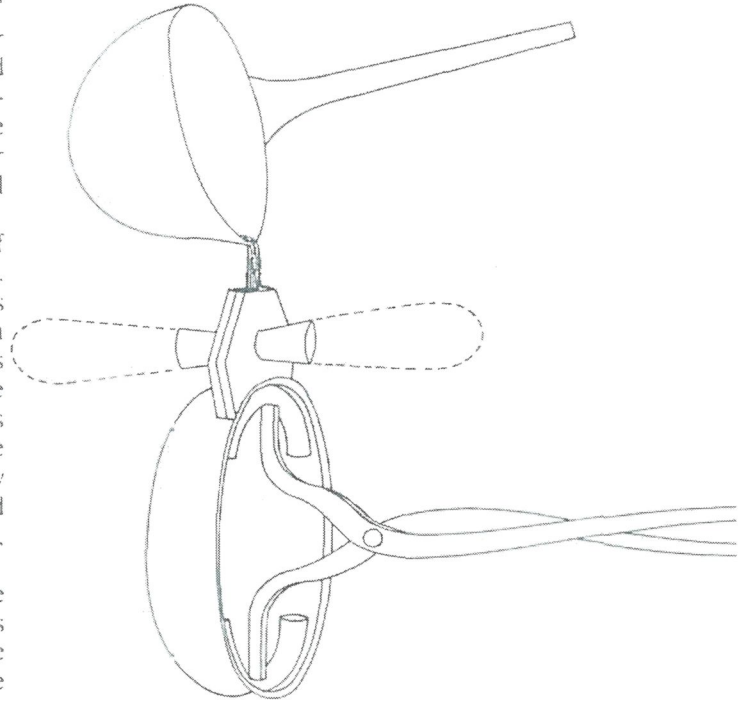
Casting a handle on the bowl of a porringer. In America, pewterers cast the handles of their porringers in place on the bowl held by cloth-covered tongs. Drawings by James L. Garvin.
